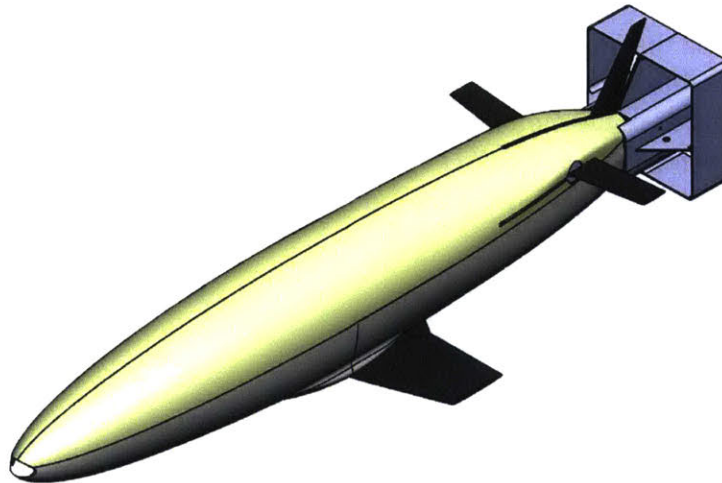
The ignition system’s laser is carried outside the motor in the shuttlecock (grey).
